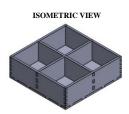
SCHEMATIC OF ISOMETRIC VIEW OF SORTING BOX USED FOR HOLDING CHAMBER.
